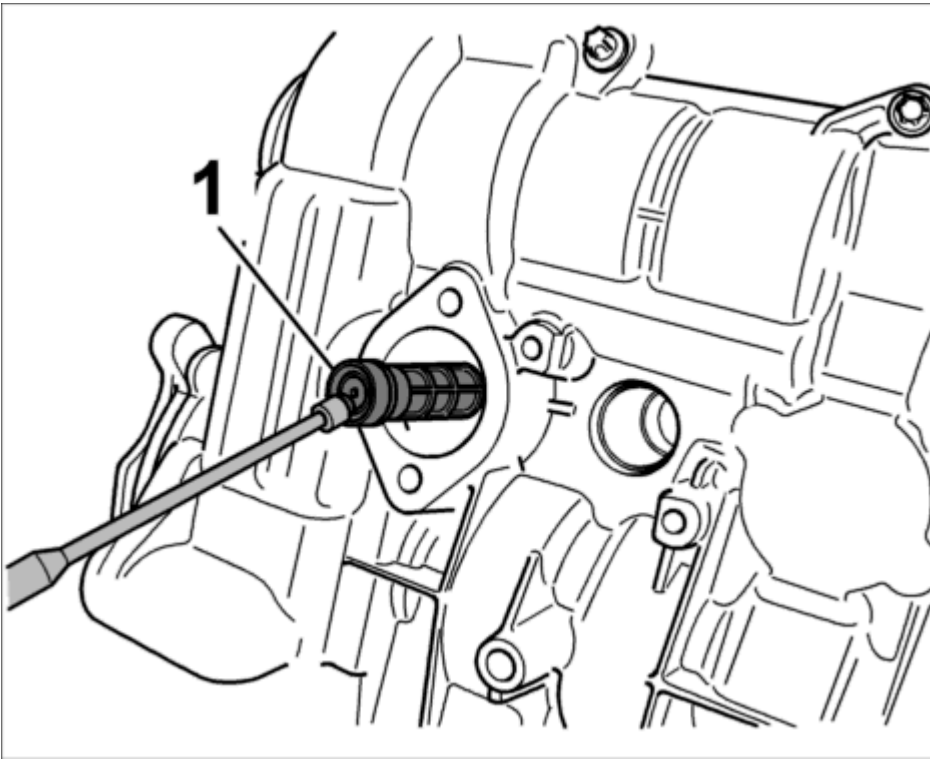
Oil strainer in hydraulic valve for camshaft adjustment
